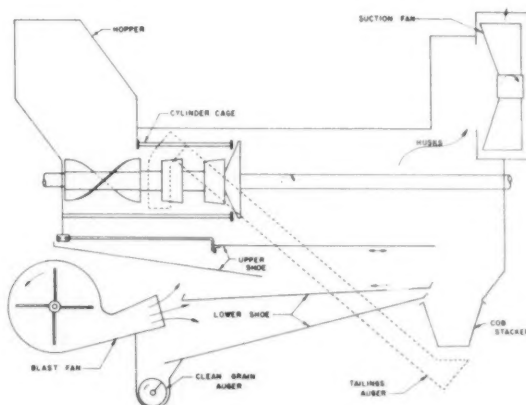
(Right) Sectional drawing of No. 71 corn sheller
